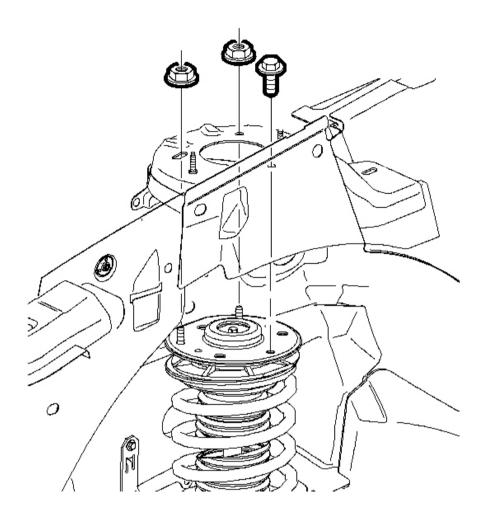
Strut Assembly & Body Fasteners Courtesy of GENERAL MOTORS CORP.
